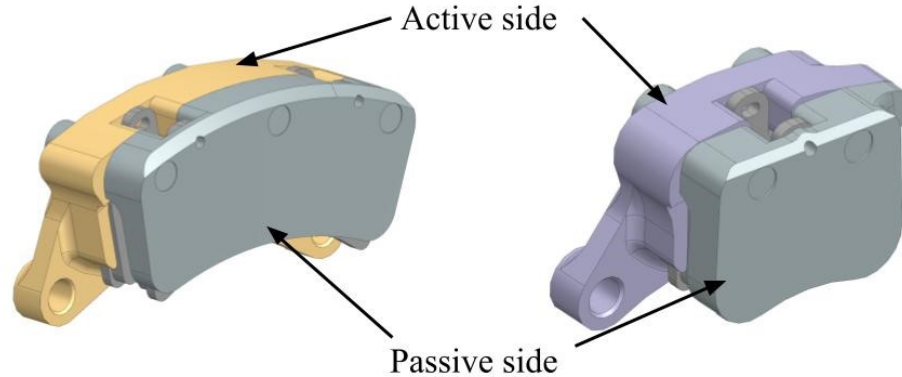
Final concept of the front brake caliper (left) and the rear brake caliper (right).
